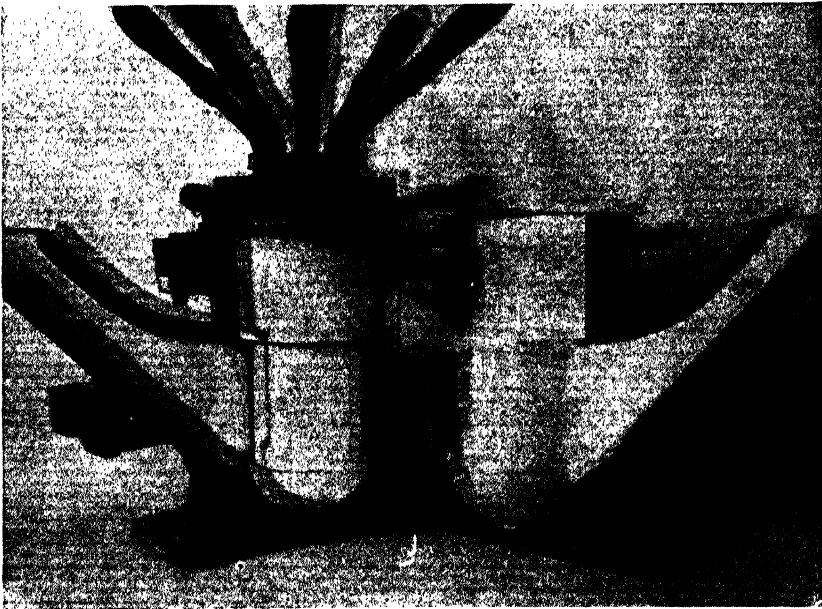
Permanent mould with sectional core for gravity die casting of lamp bases.
